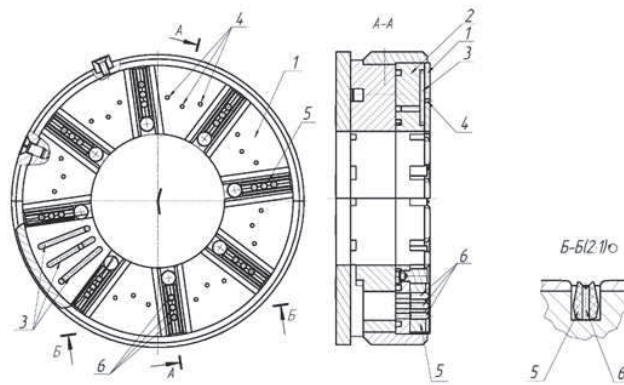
Thrust reversible bearing with nonreversible (combi) properties: 1 – thrust pad, 2 – thrust bearing carrier, 3 – hydrostatic pockets, 4 – holes for supplying lube oil into hydrostatic pockets, 5 – reversible oil removal scraper, 6 – channels for individual lube oil supply.
